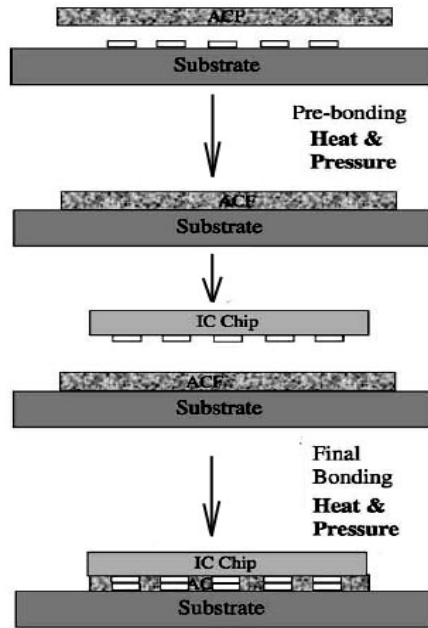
Anisotropic Conductive Adhesive Flip Chip Assembly Process
